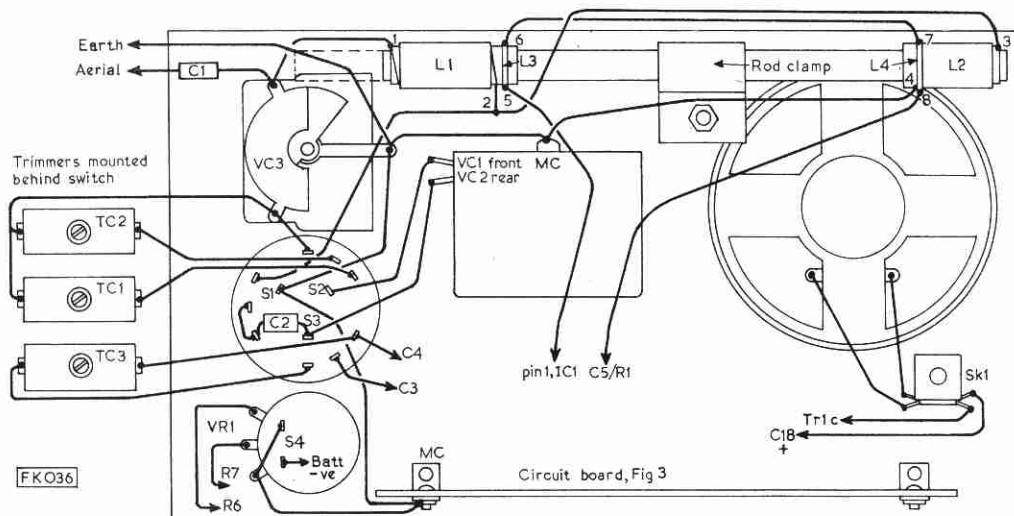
Front panel component location and interwiring. Capacitors C3 and C4 are mounted between the board and the front panel.
